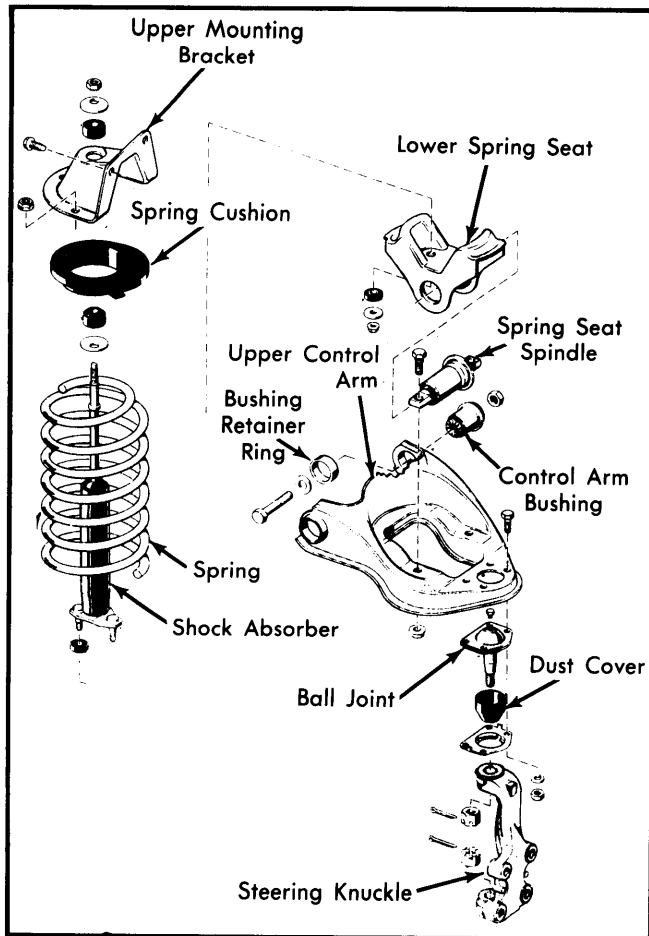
Exploded View of Upper Control Arm & Coil Spring Components (Concord & Spirit)
